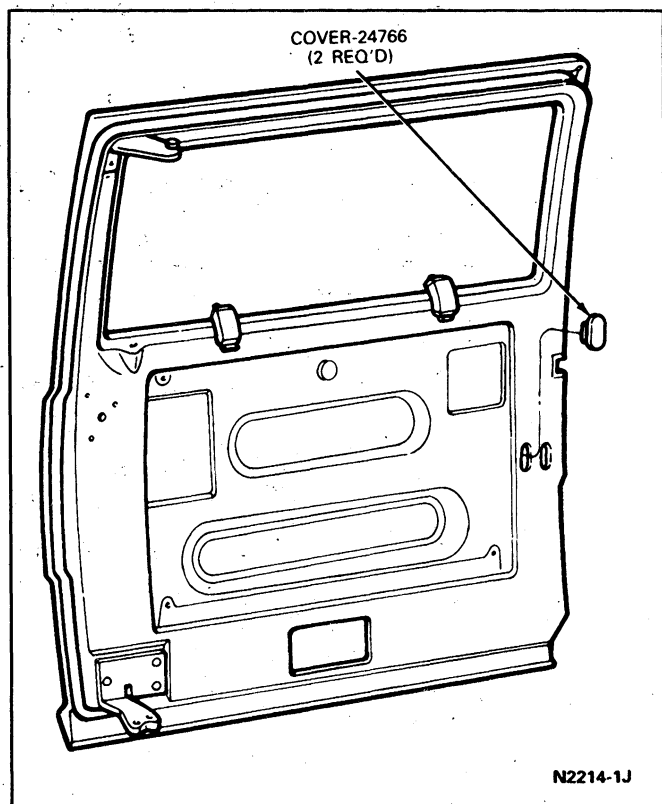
Sliding Door—Access Hole Covers—E-150—E-350
